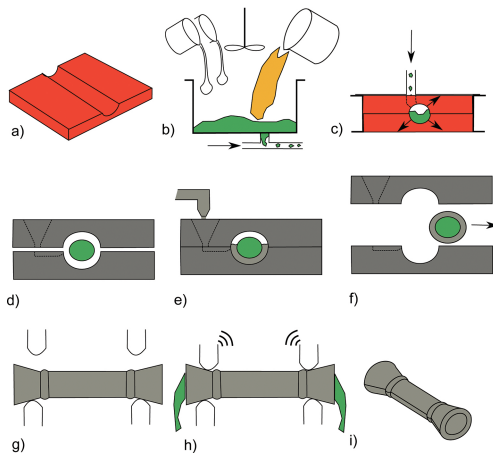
Brief overview of highly automated core production: (a) half section of a core model, (b) preparation of the molding material mixture, (c) core shooting process, (d) inserting the core in the mold, (e) casting process, (f) removal of the casting with the core (gating is not shown), (g) clamping the casting, (h) shake-out of the core, and (i) casting.
